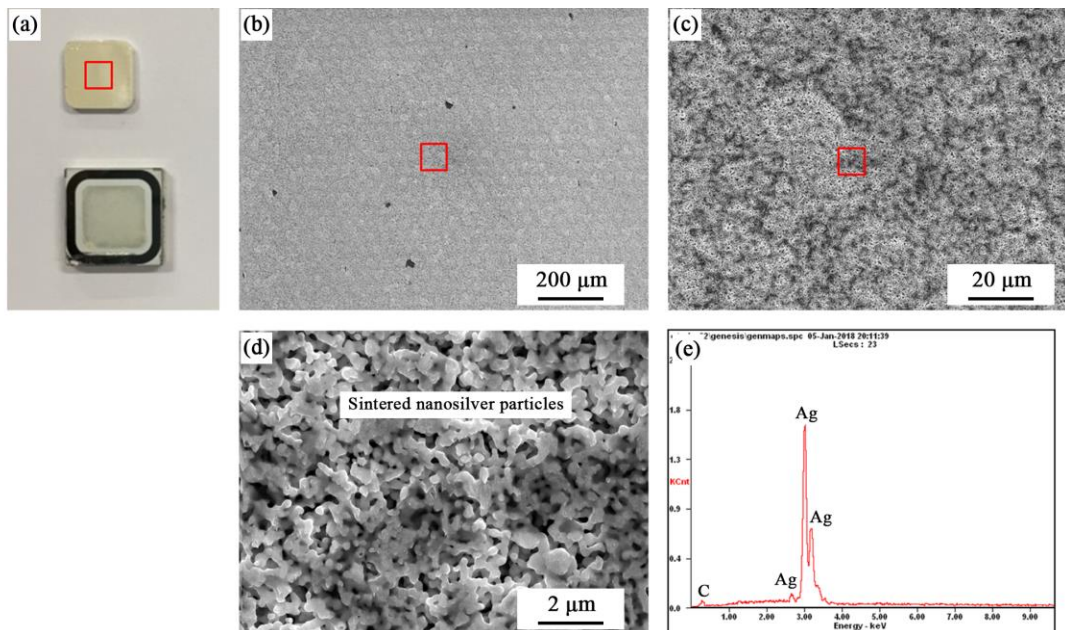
Fracture morphology of sintered package under 5 MPa, (a) optical image of fracture surface; (b), (c) and (d) are the gradually partial magnified image of (a); (e) EDS pattern of the fracture surface in (d)
